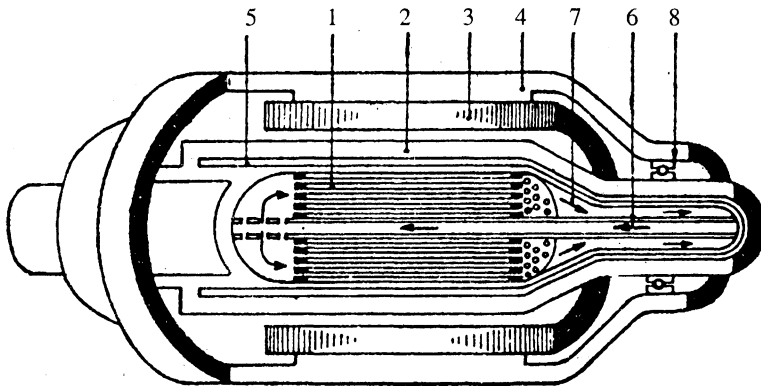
Synchronous generator with superconducting winding. 1–Superconducting field winding, 2–rotor body, 3–stator core, 4–iron shielding, 5–vacuum insulation, 6–helium inlet, 7–helium outlet, 8–bearing.
